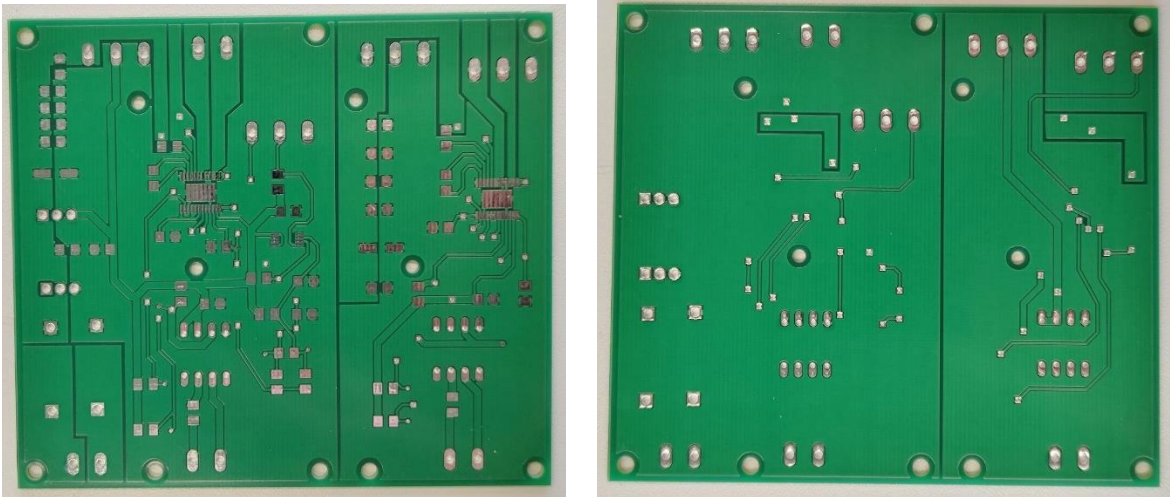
DRV8873H PCB (Top Layer left and Bot Layer right)
